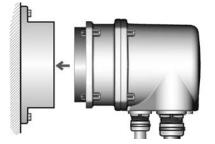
Parking frame and plug/socket connector with terminal blocks (KES)
